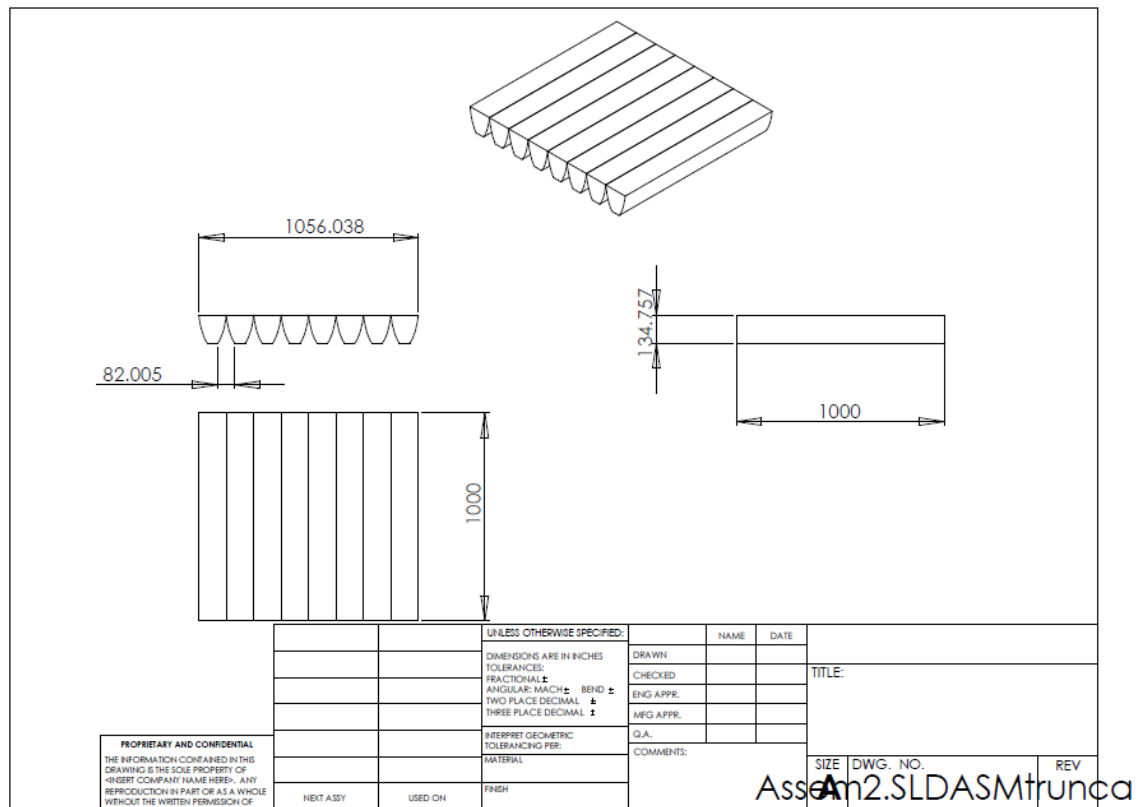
Plan assembled original truncated SRCPC CAD drawing showing 8 concentrators in 1m x 1m dimension.
